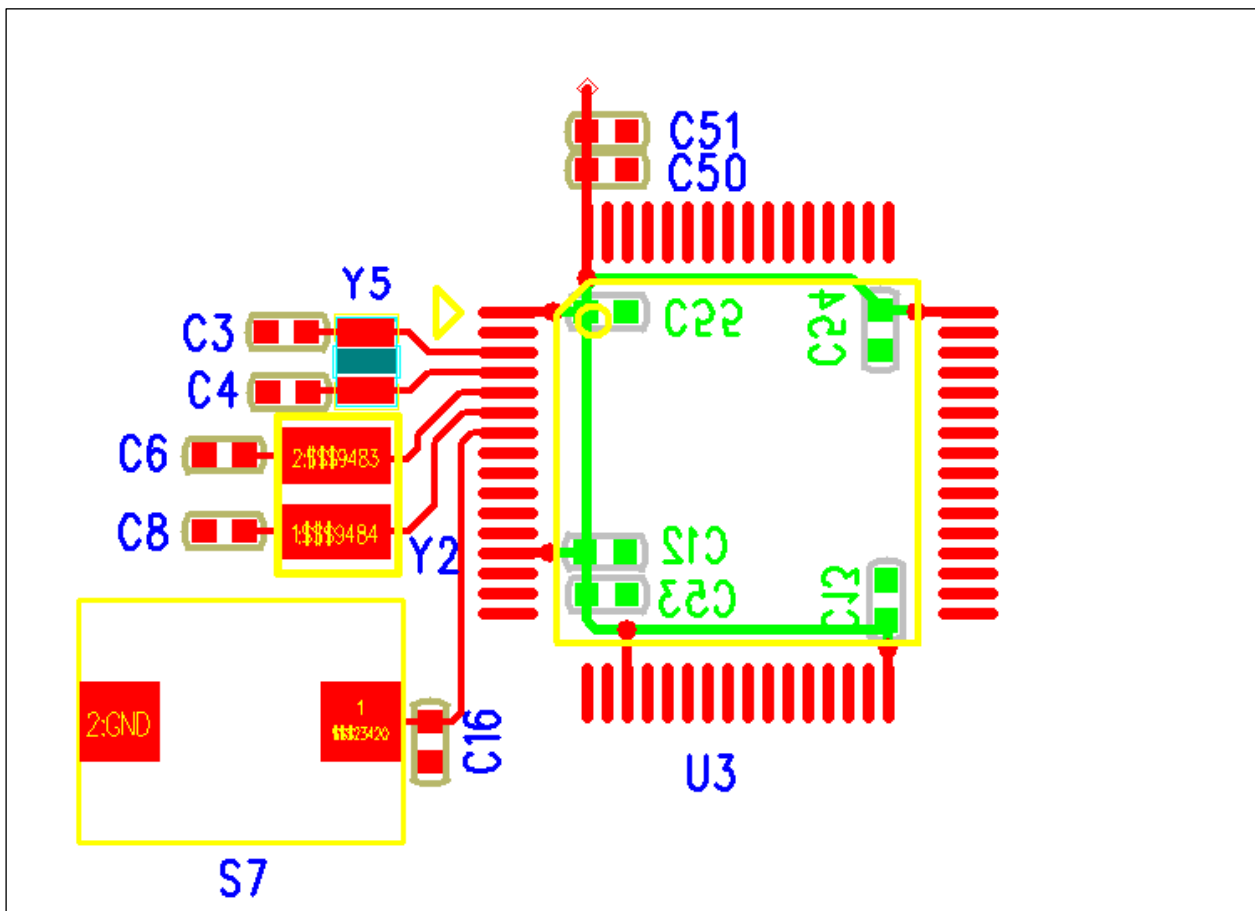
LQFP64 Package PCB LAYOUT reference diagram
